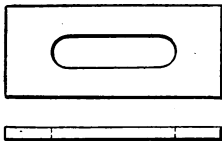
A Piece of Work for which the Punch Should be Provided with Shear.
